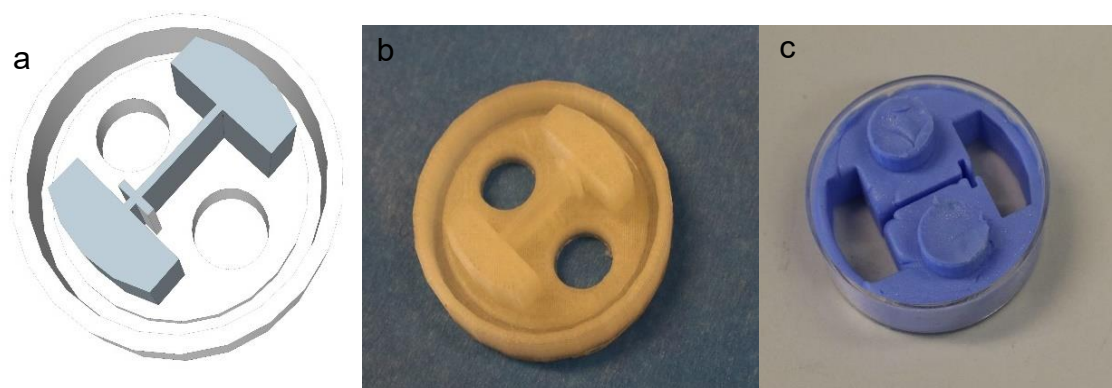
Fourth PLA mould design, 3D printed PLA mould and silicone cast. a) CAD design created in Google Sketch Up (64 bit) 2017 for the PLA mould. b) 3D printed PLA mould printed using Ultimaker 3 extended. c) Silicone cast created from the 3D printed PLA mould. Results representative of the production of three silicone casts. Silicone casts tested for leakage in 3 independent experiments.
